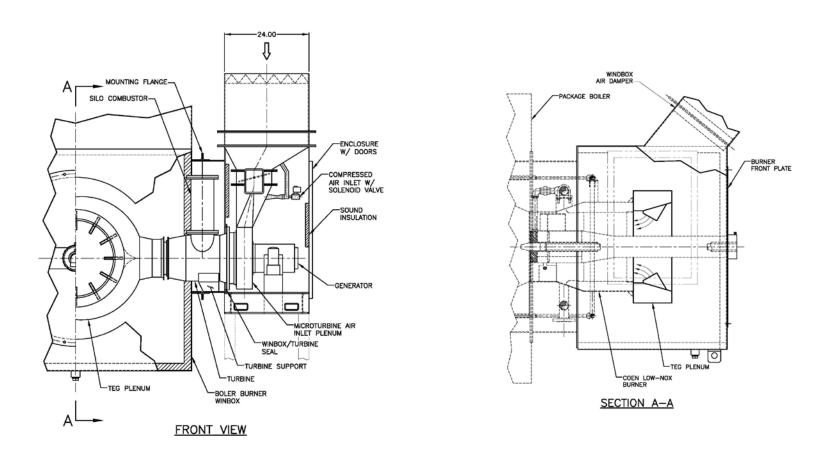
Prototype Burner with Microturbine Assembly (Left: Front View; Right: Section A-A)
